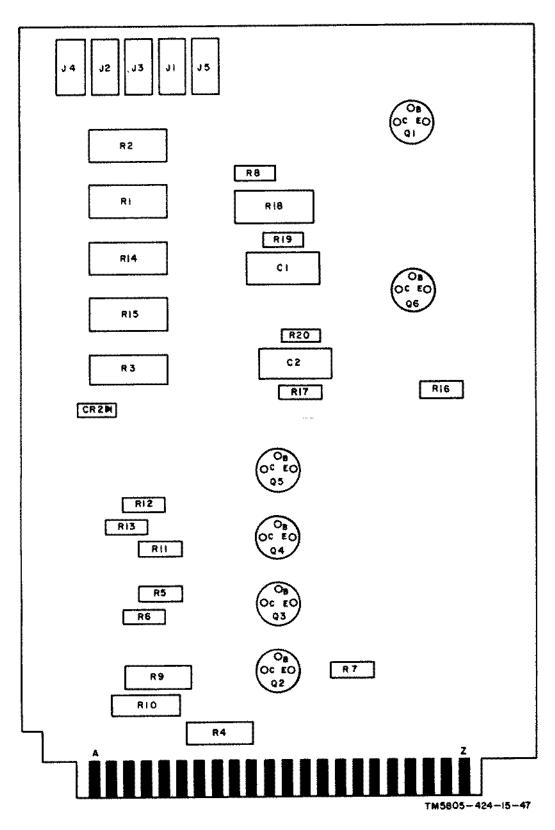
Printed-circuit card assembly A14 (PC 80034170), component location diagram.
